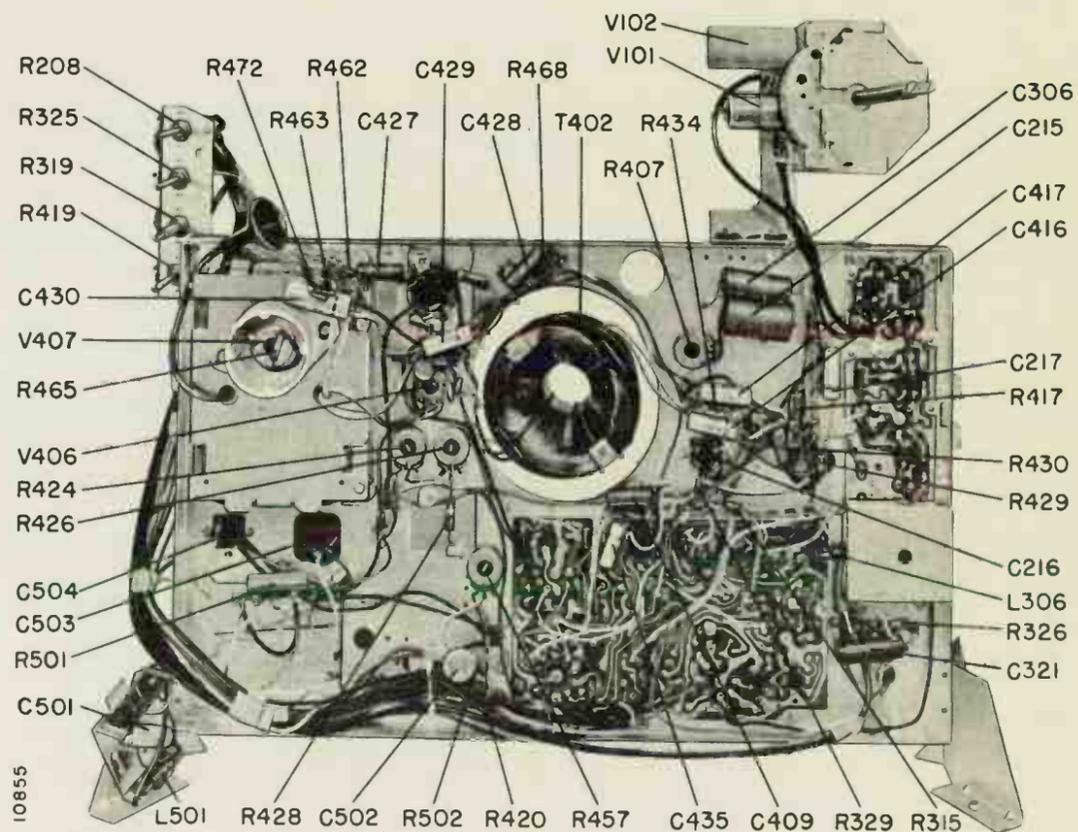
Wiring Side of Chassis With Single Ended Sound Amplifier.
